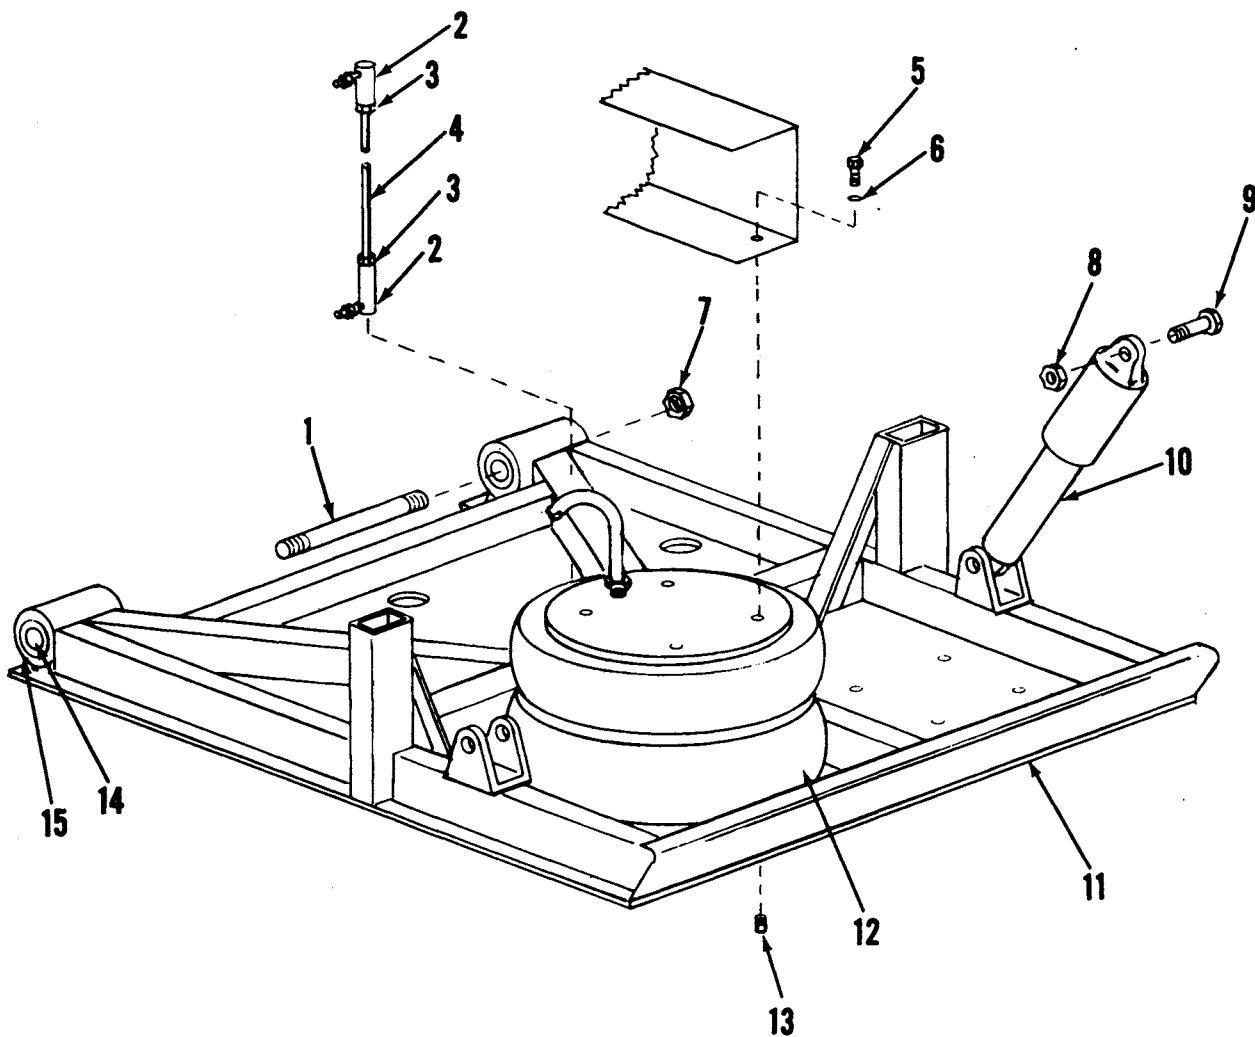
Air Mounted Fifth Wheel Kingpin Assembly.
